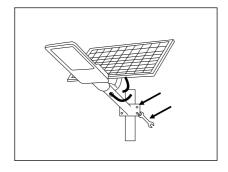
If it is installed on a pole, it can be locked on the pole with the holding piece in the accessory kit and 4 external hexagonal screws. (This step shares 4 external hexagonal screws)
